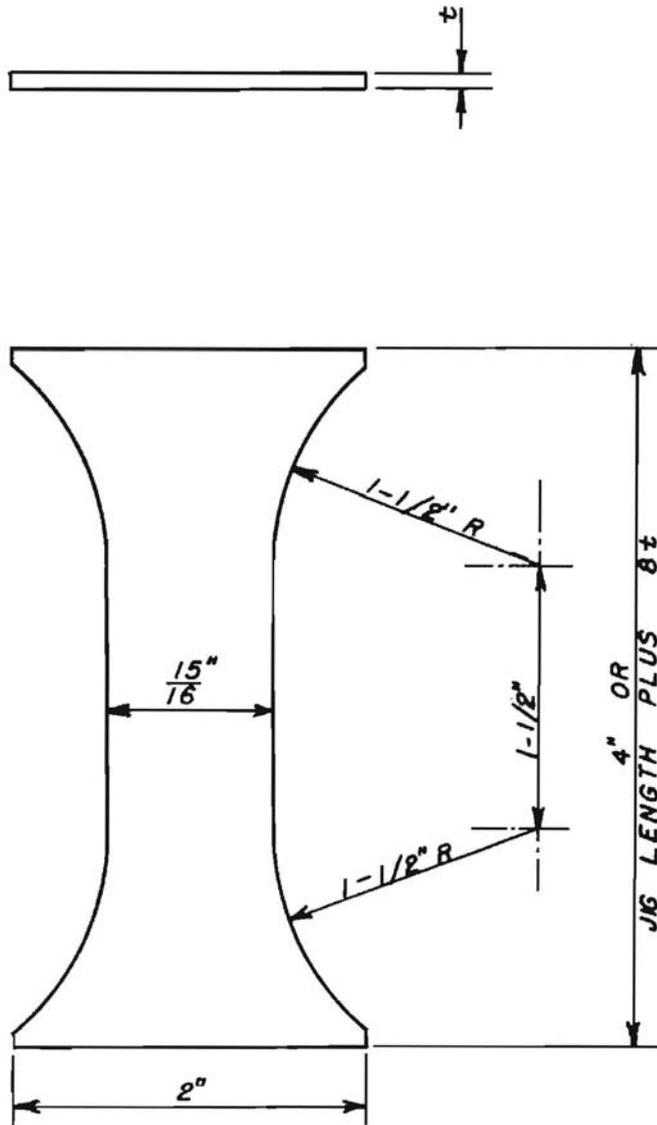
Compression specimen for edgewise tests of thin single-sheet material.
